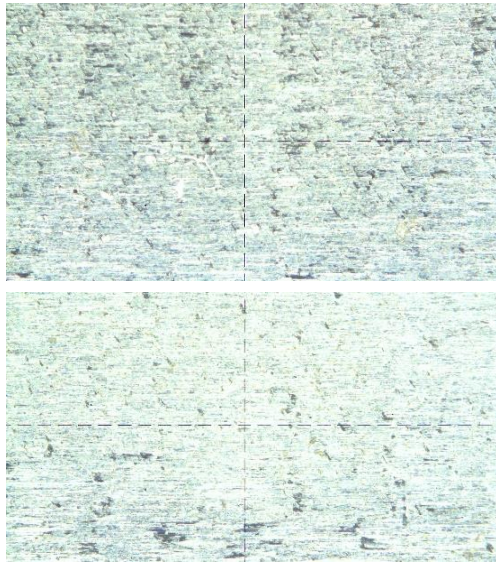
The worst (above) and finest (below) machined surface under microscope
